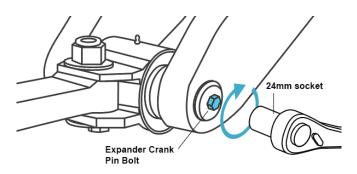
1 - 38 Verify the Expander Pin Bolt Torque
